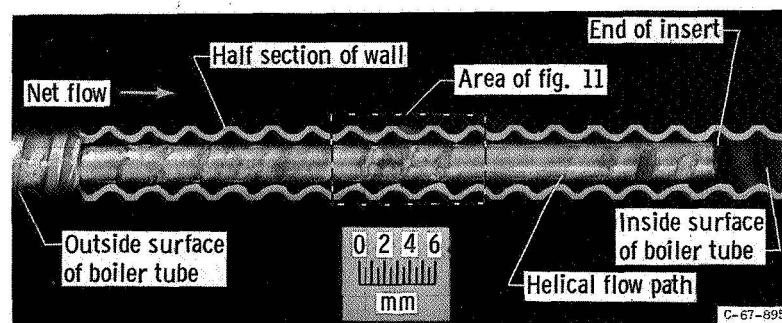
Cutaway view of boiler inlet showing cylindrical insert and attack after 1147 hours.
